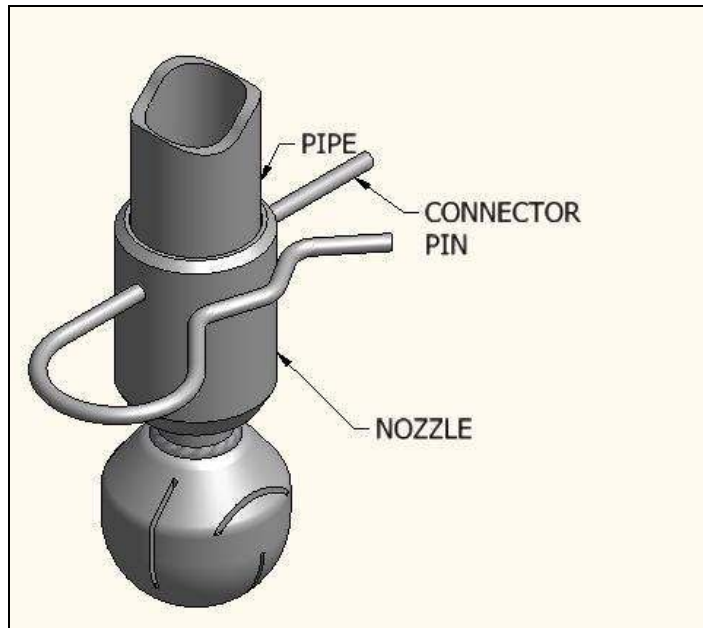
Final Assembly of Nozzle with Clip-On Connection
